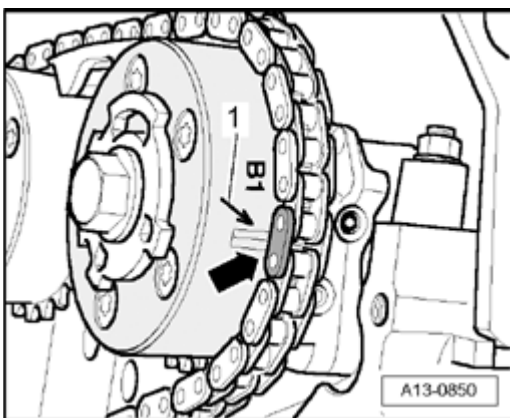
Copper-Colored Chain Link & Marking (Exhaust Camshaft Adjuster)
